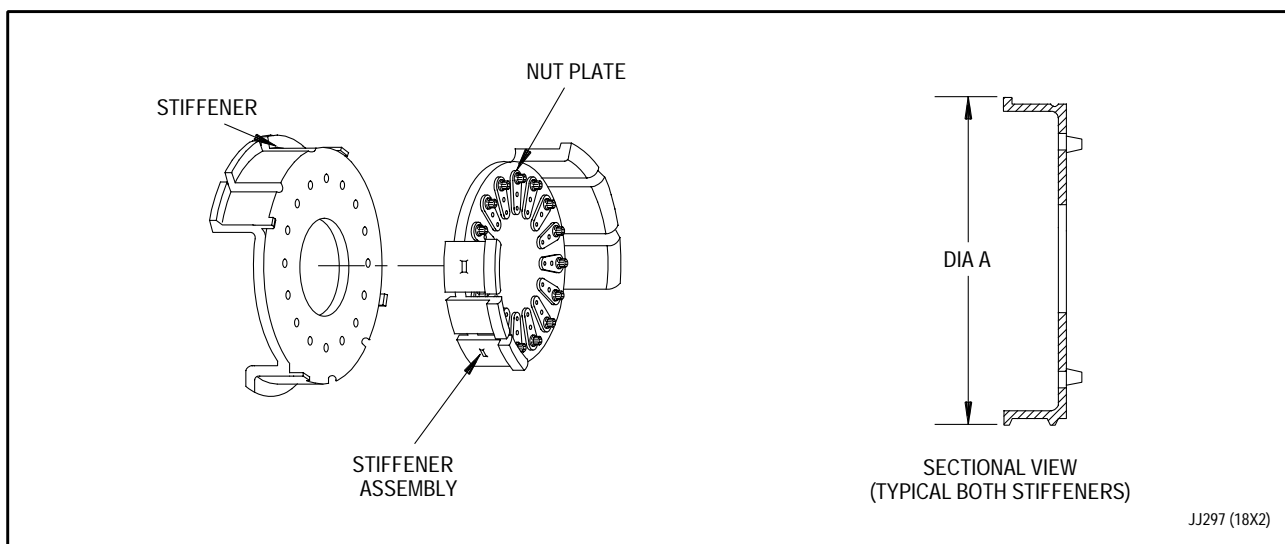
Front Compressor Drive Turbine Shaft Stiffeners - Blend Repair
